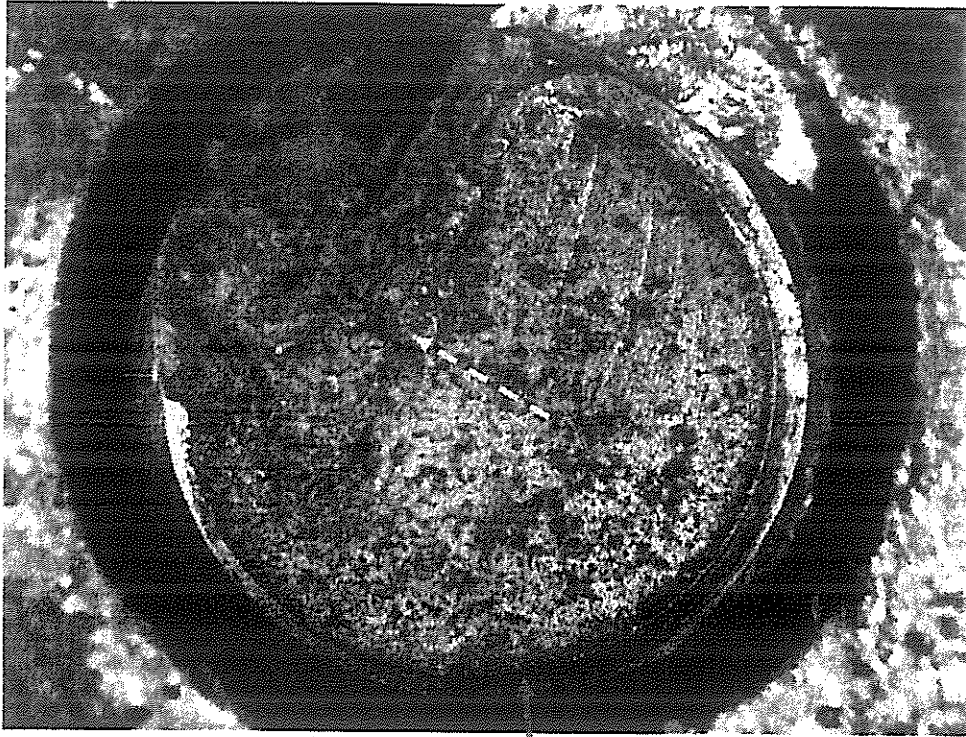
Bolt 5 – fracture features revealed that breakage occurred in unidirectional bending fatigue, but origins were originally nearer the inner diameter – centerline is down
